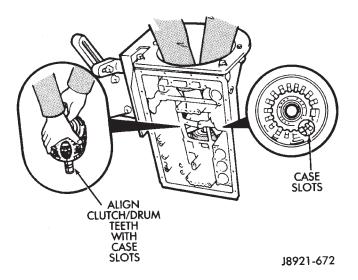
Output Shaft/Rear Planetary Assembly Installation
